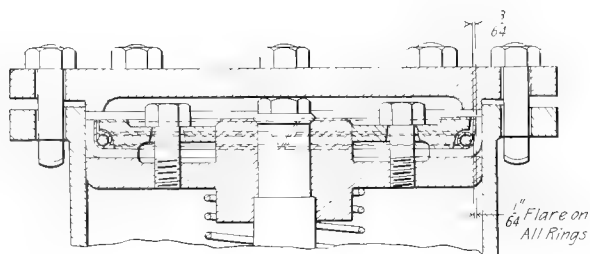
J-M Slip Type Expander Ring for Air Brake Cylinder Packing Leathers. H. W. Johns-Manville Company.
